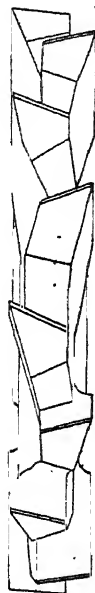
(Right).—A staggered spiral-tooth mill for slotting.
